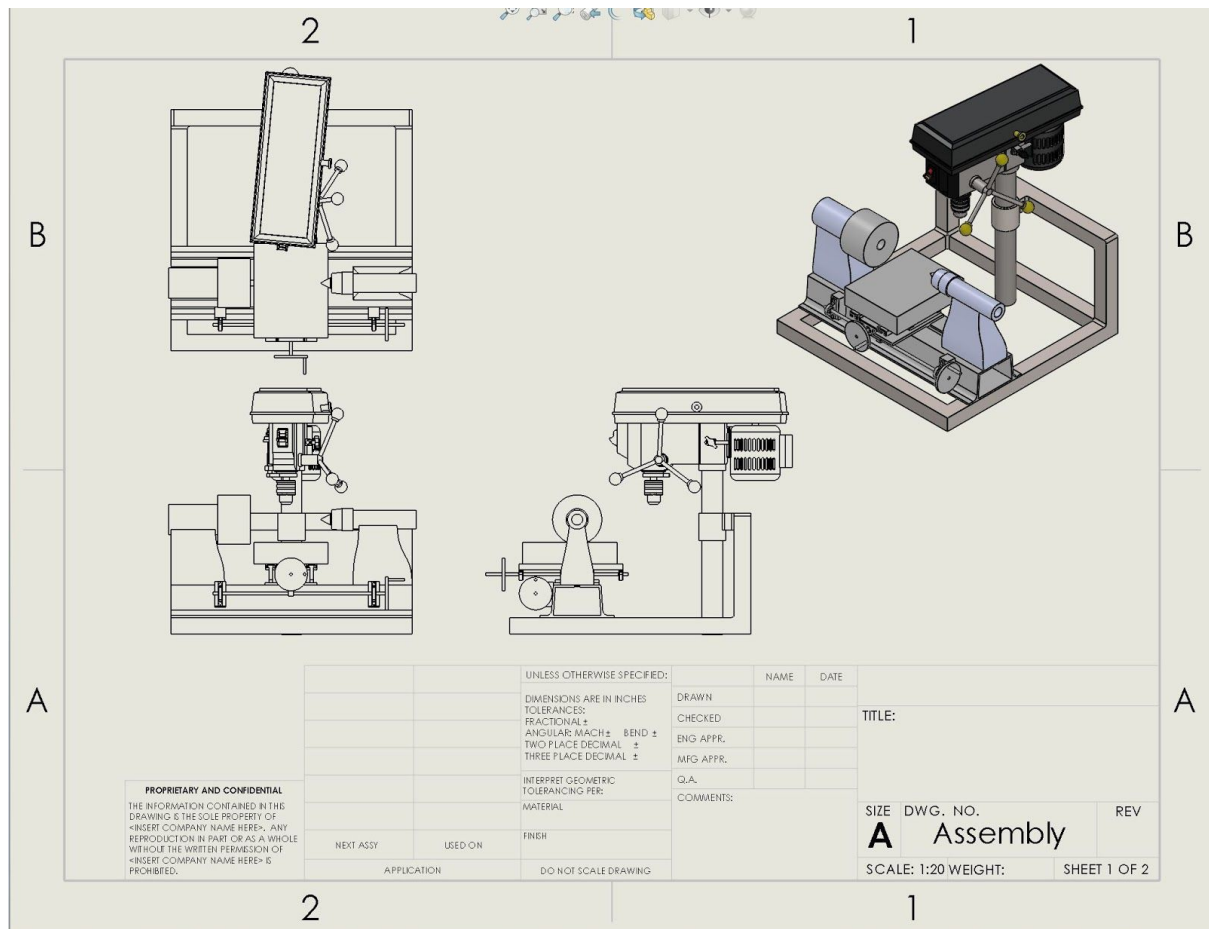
Finalized Preliminary Embodiment Assembly Drawing
